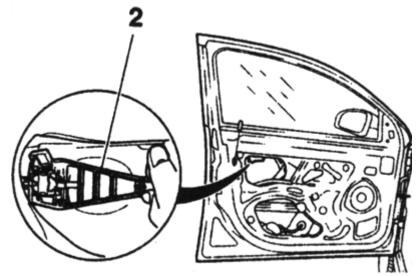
Extract reference Staples in the District Pens of door assembly
